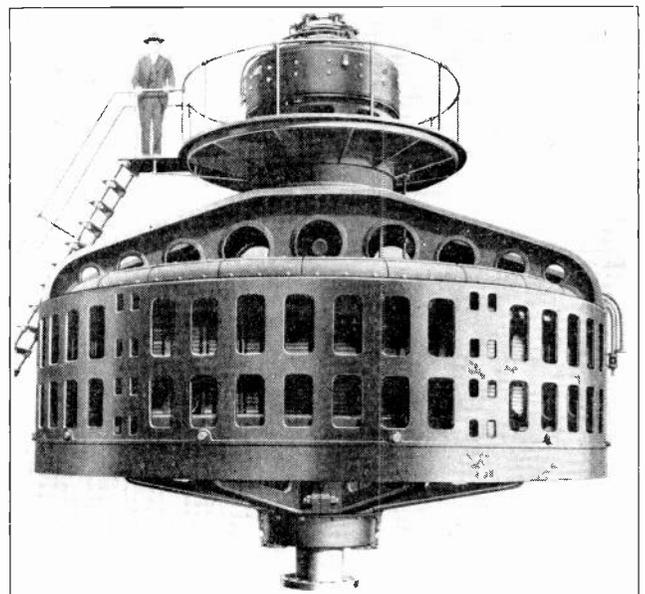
Large vertical type alternator for water-wheel drive. The stator core and windings of this machine lay in a horizontal position just inside the lower frame work, and the field poles revolve on the vertical shaft within the stator. (Photo Courtesy Allis Chalmers Mfg. Co.)
